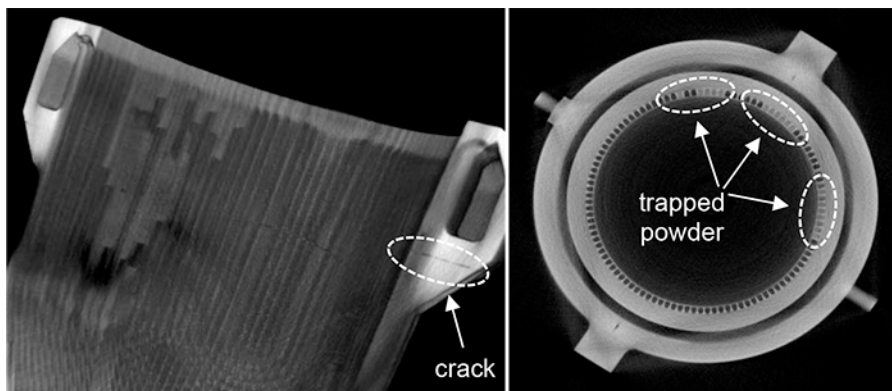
Computed Tomograms Showing an Embedded Crack (Left) and Trapped Powder (Right) Inside on Cooling Channels in a Direct Metal Laser Sintered Copper Chamber (Courtesy of NASA Marshall Space Flight Center)
